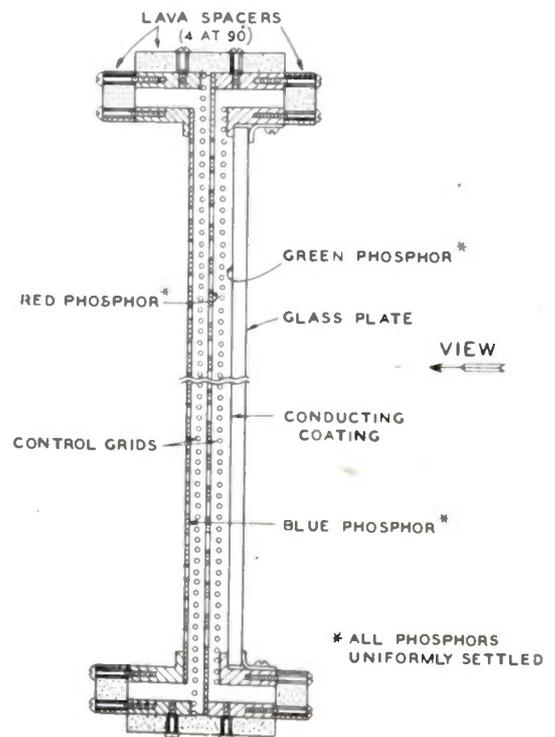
Screen assembly, three-color, grid-controlled color kinescope.
